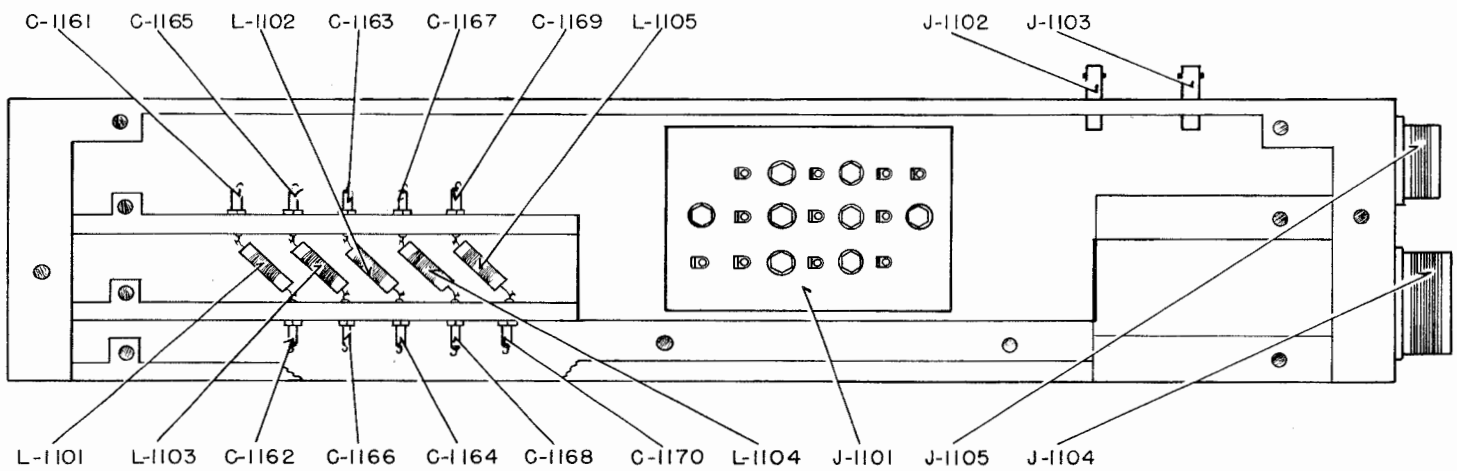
Component Locations Inside of R.F. Filter Compartment, Keyer KY-62/FRR-24
